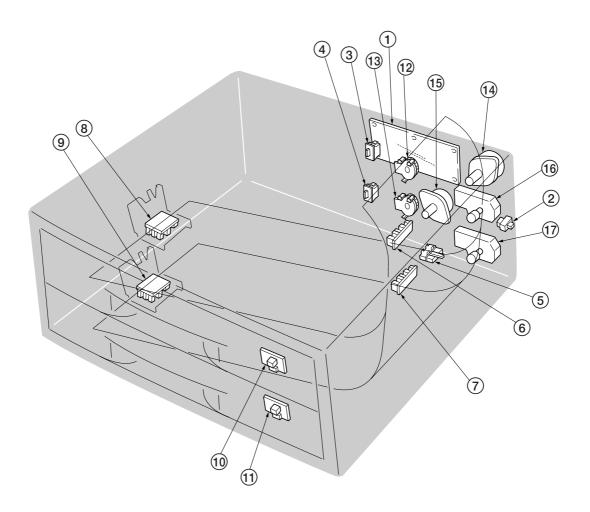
Electrical components layout (250-sheet paper feeder)
